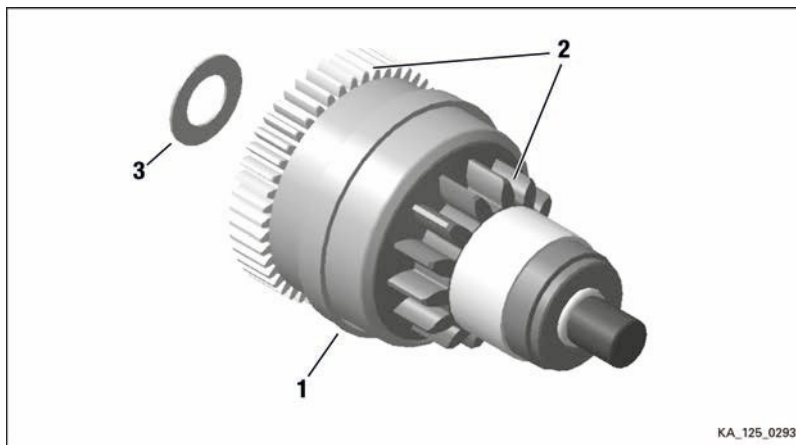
Starter reduction gear assy. 啟動減速齒輪總成
